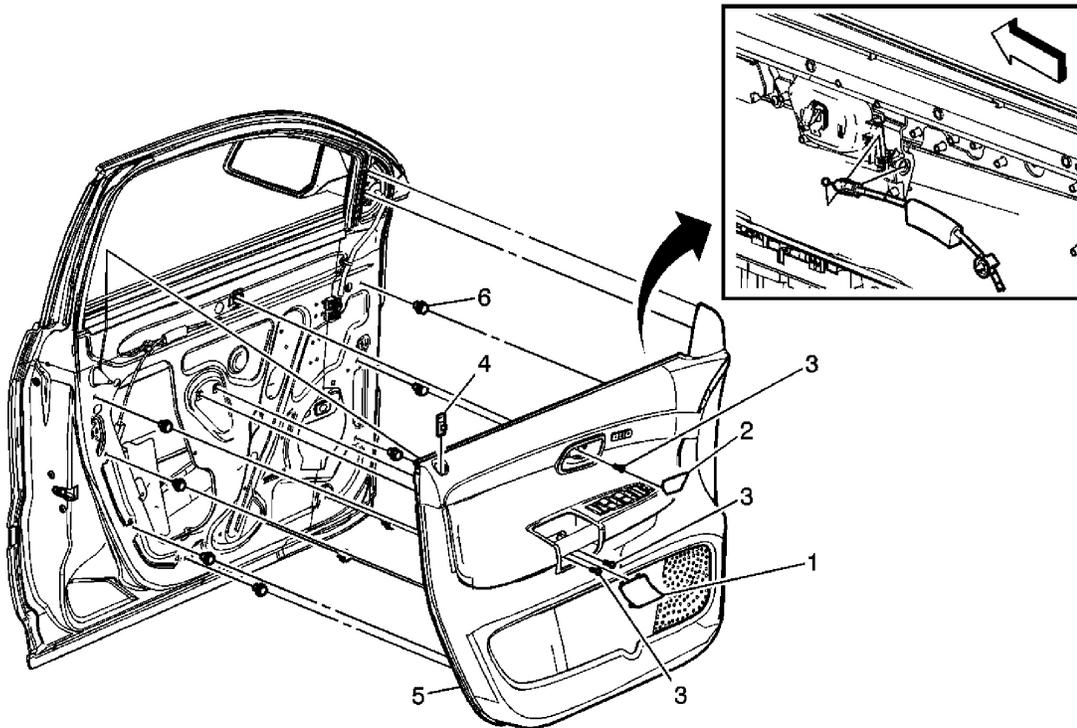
Identifying Front Side Door Trim Panel - Left Side
